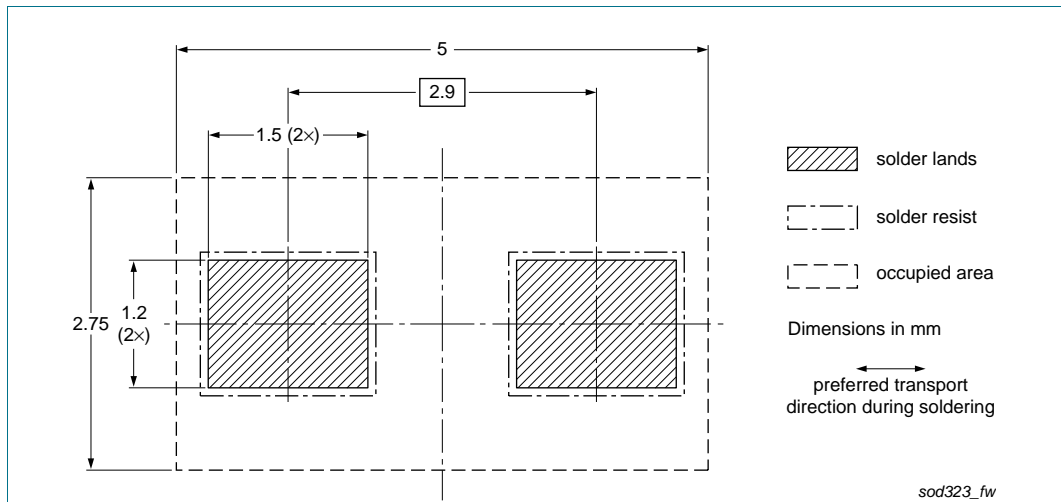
Wave soldering footprint BAS316 (SOD323/SC-76)
